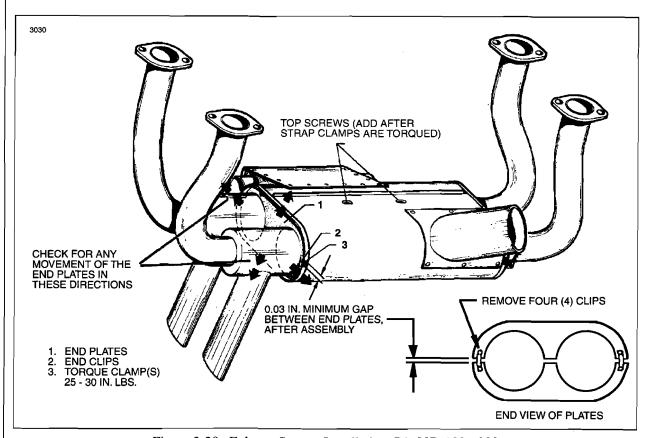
Exhaust System Installation, PA-28R-180, -200
